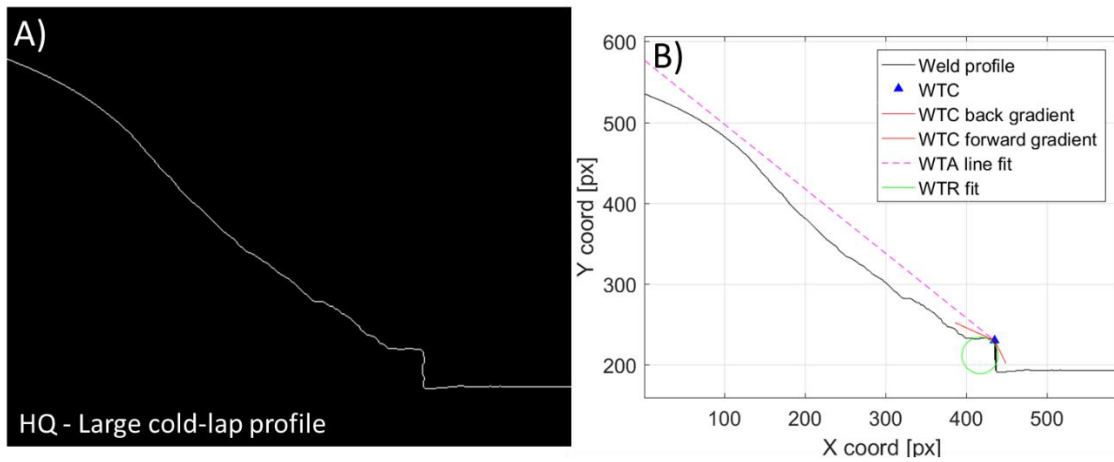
HQ weld profile with large cold-lap defect - A) original single-pixel weld profile; B) weld toe geometry extraction after MATLAB processing.
